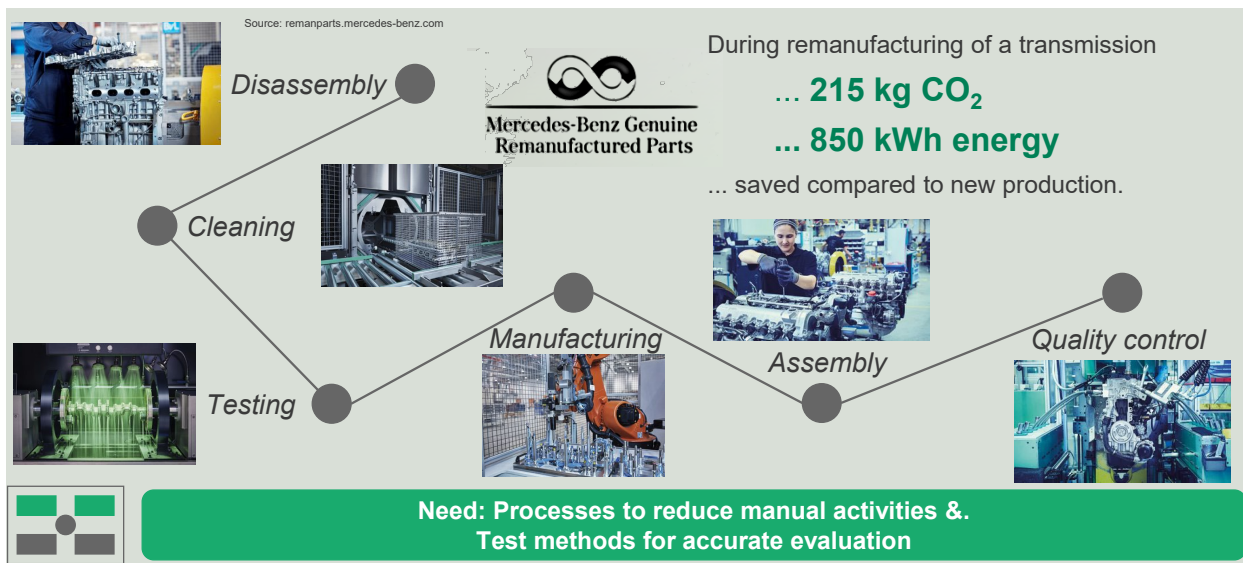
Spare parts made at Mercedes-Benz through remanufacturing [22]
